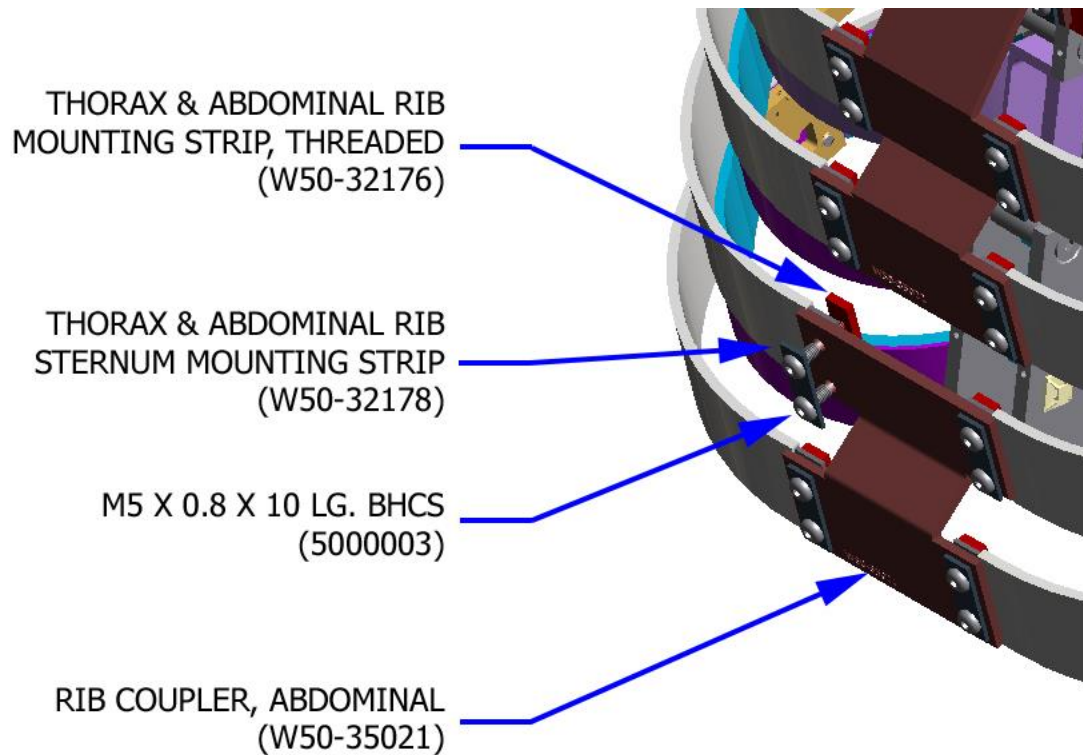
Detailed view of attaching the thorax and abdominal mounting strip to the bottom two ribs.
